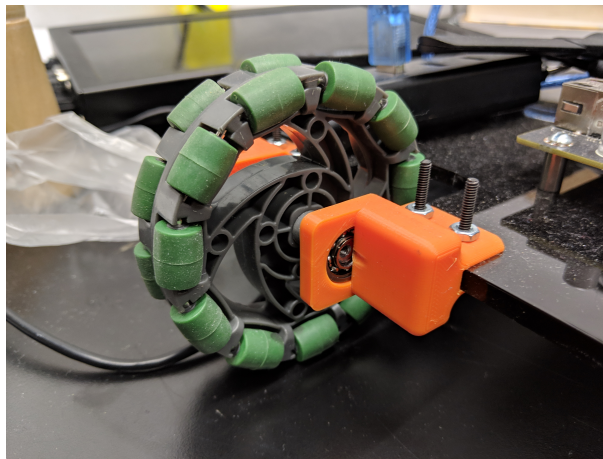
Omni-Directional Wheel with Custom Orange Mounting Piece
